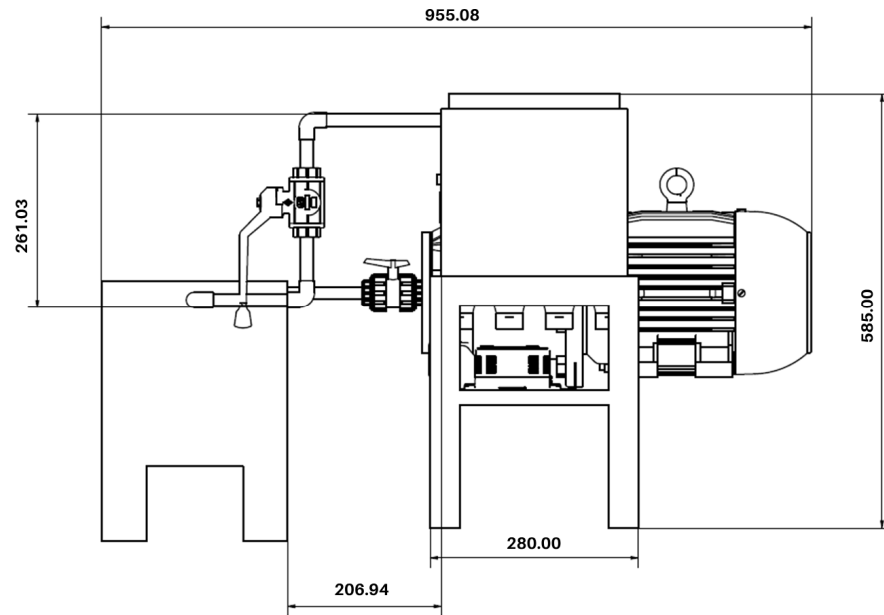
Dimensions of continuous ultrasound device. These dimensions are in millimeters.
